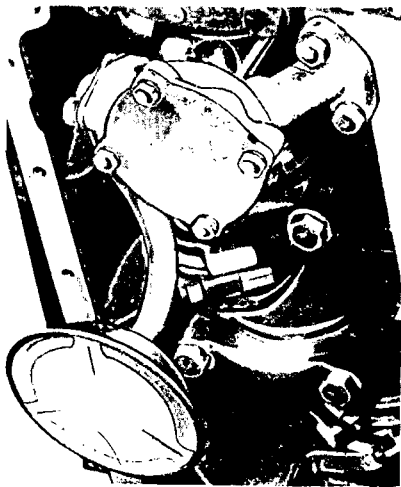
Typical Oil Pump and Inlet Tube Installation
